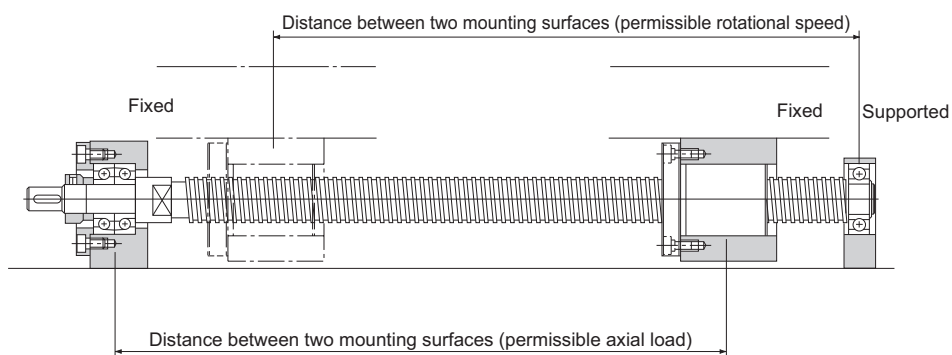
Screw Shaft Mounting Method: Fixed - Supported
